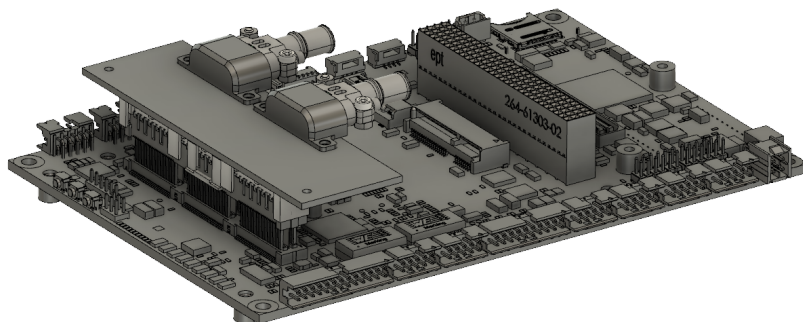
ELTON Carrier board selected for the OBC design. Manufacturer: Diamond Systems
